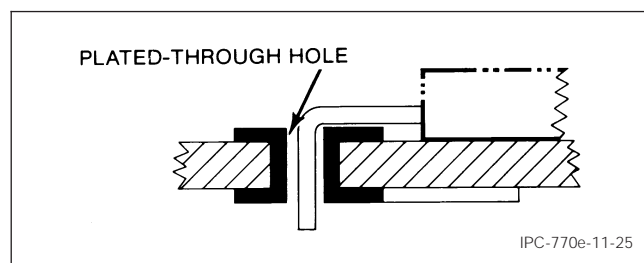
Through-Hole Mounting (Flatpack Outline Drawing)
